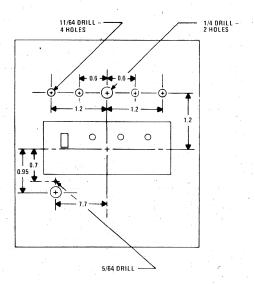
Drilling Guide for the Case Top if the MRC-1-10 Rotary Function Switch is Used. (Dimensions in inches.)
